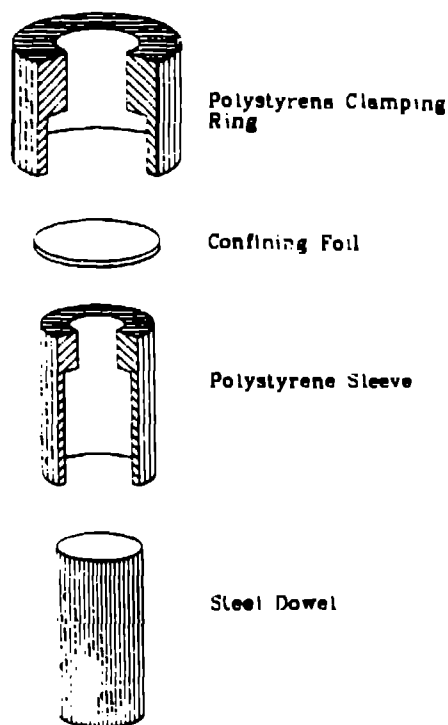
EXPLODED VIEW OF SAMPLE HOLDER
